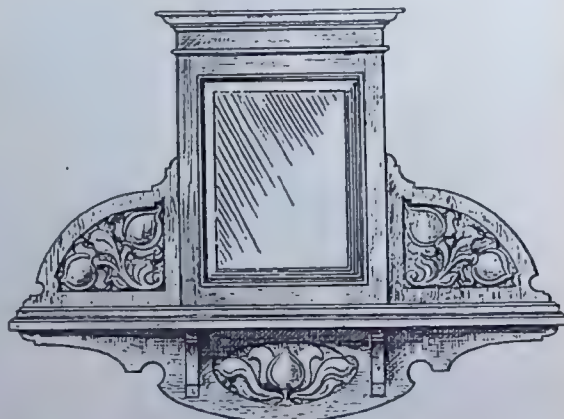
THE SHELF WITH BEVELLED MIRROR INSTEAD OF CARVED PANEL.
